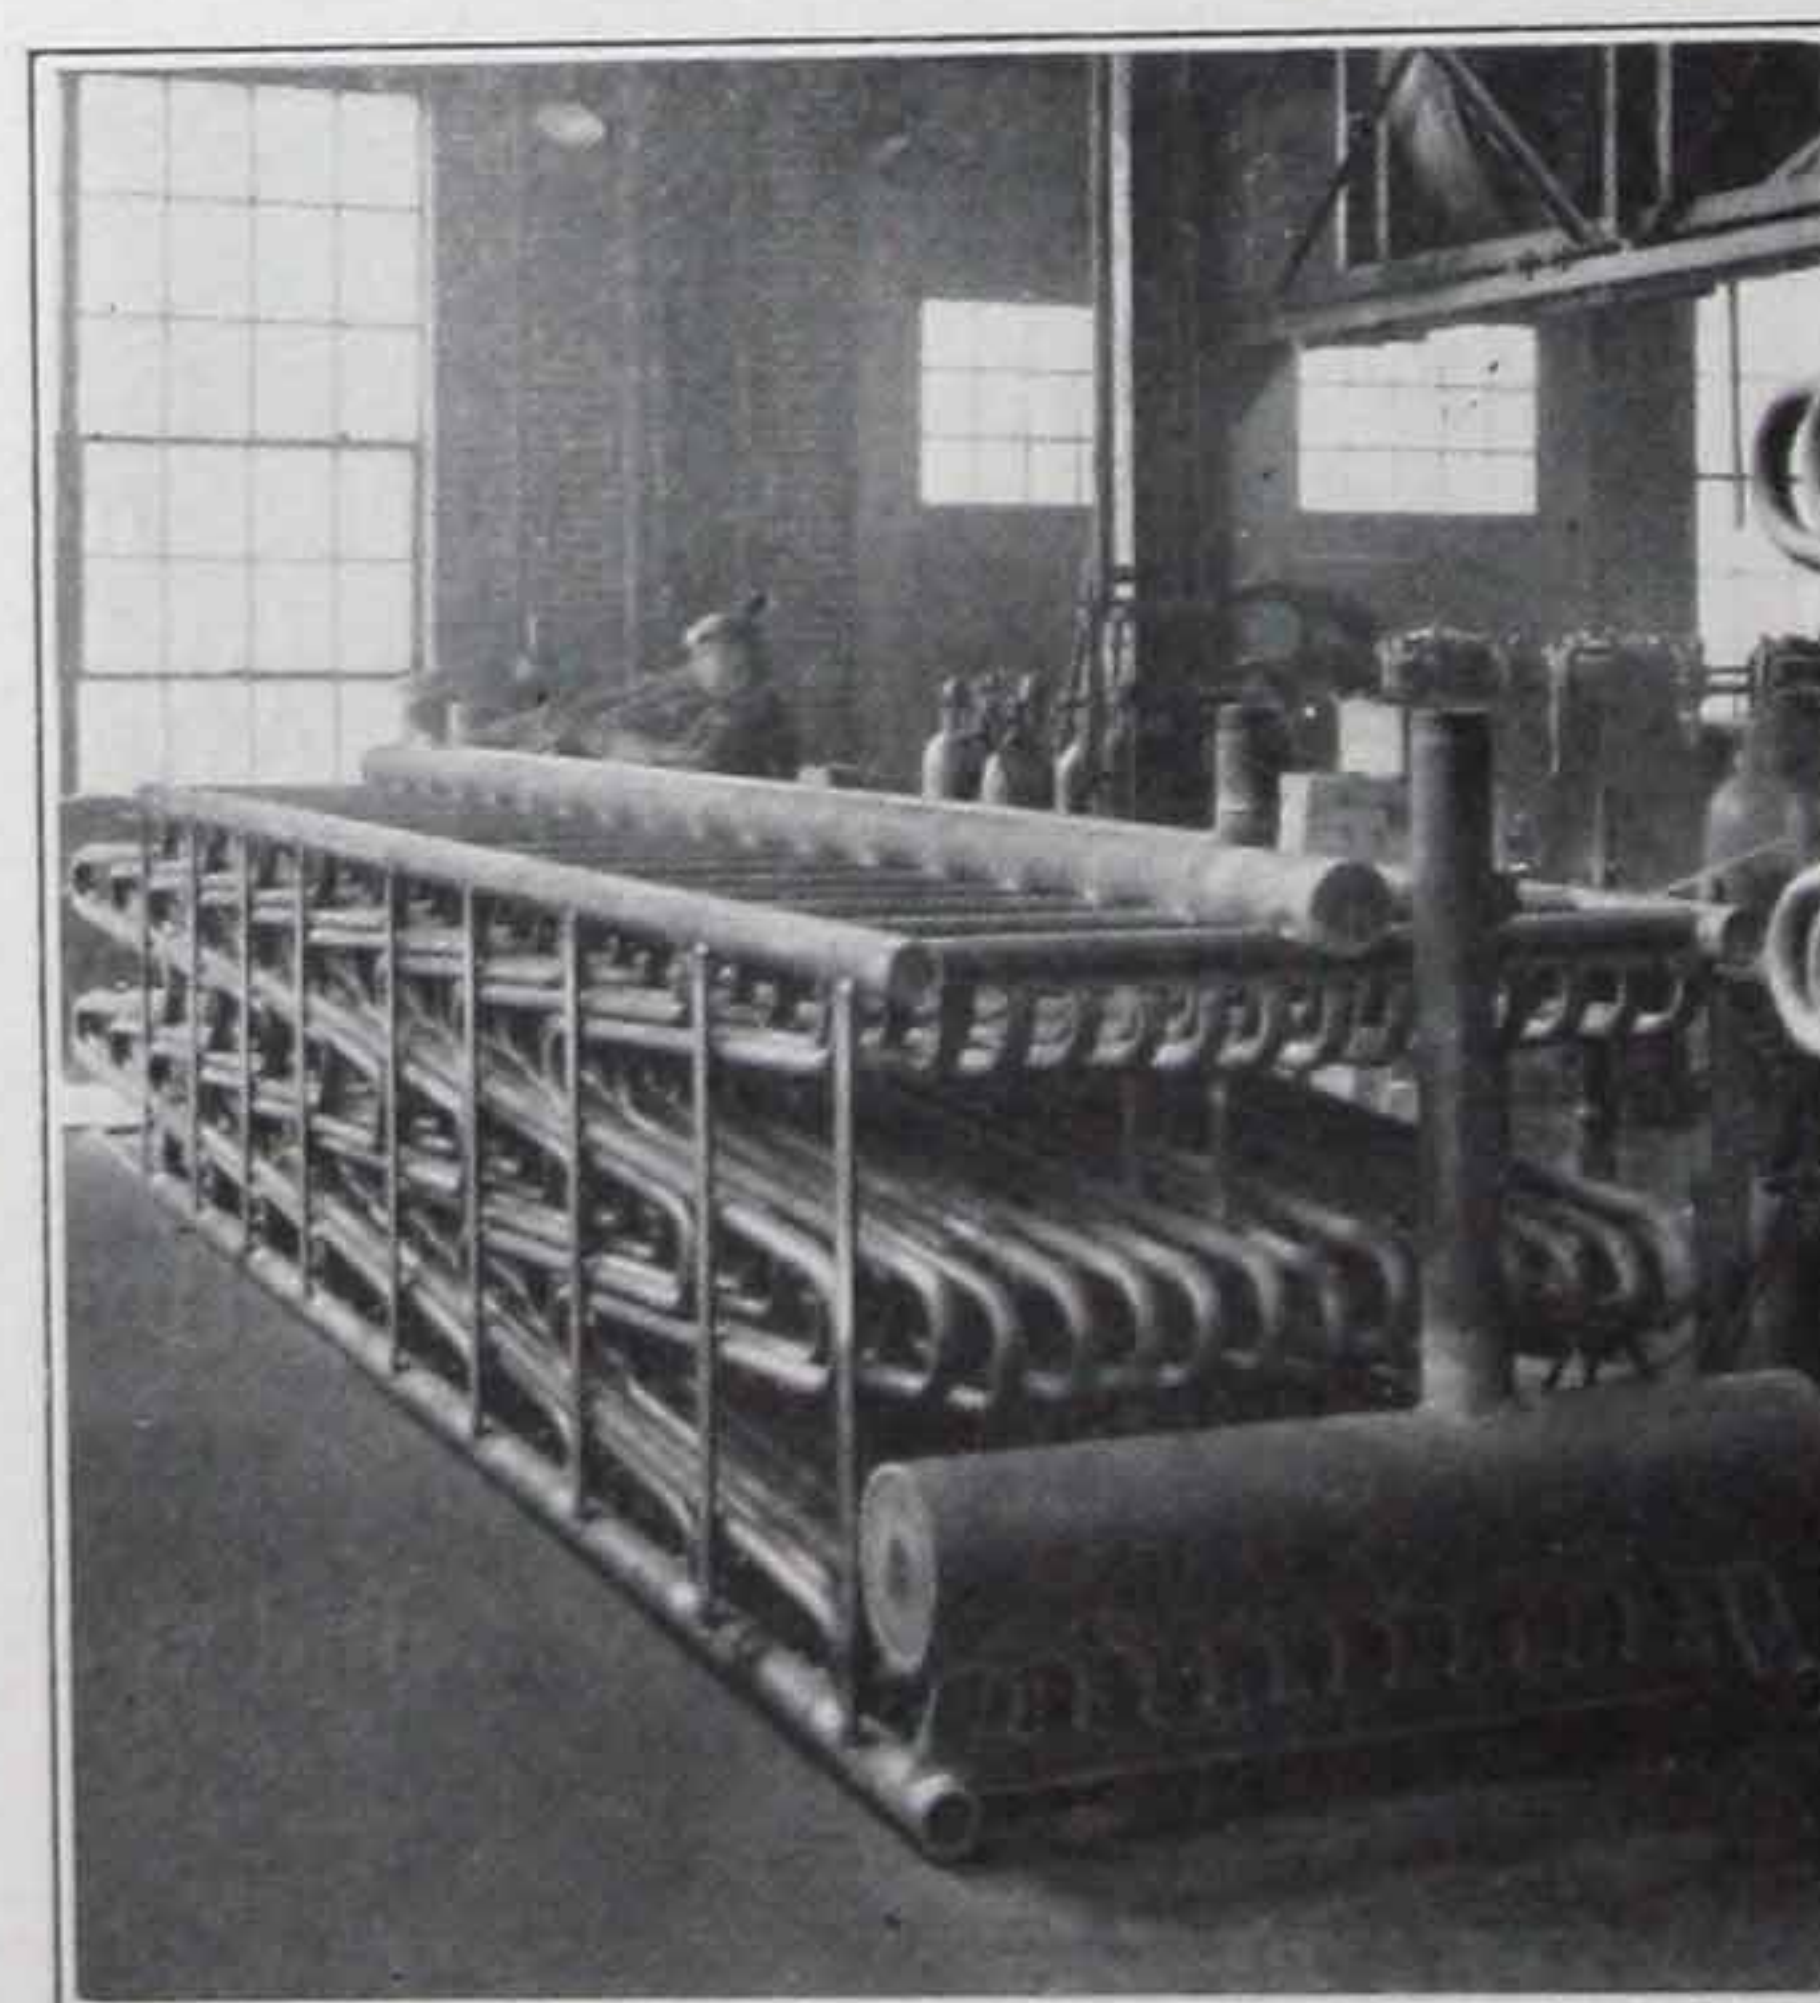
Vertiflow Unit Coil Being Welded
